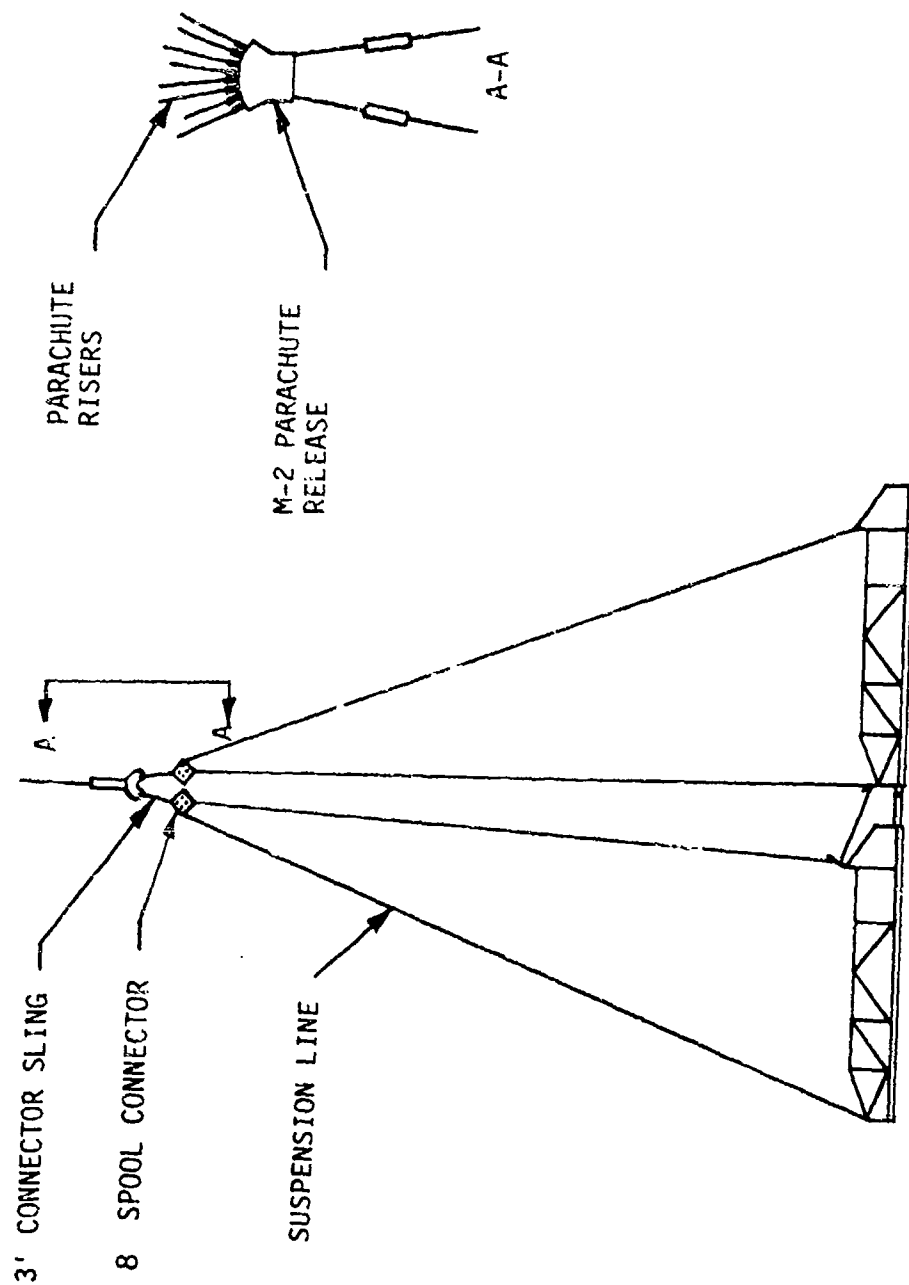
Arrangement of Suspension Lines - Two-Platform Assembly
